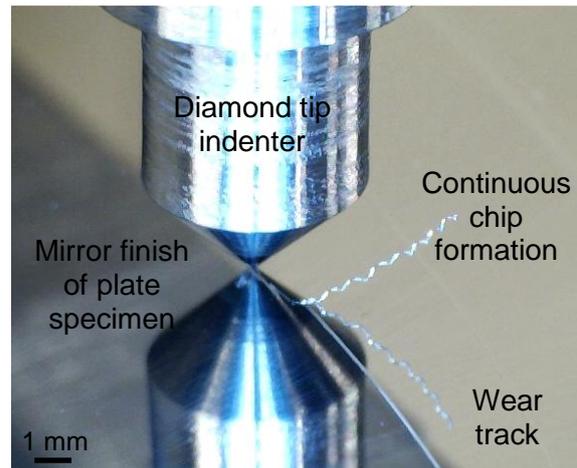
Material removal through micro-cutting during abrasive scratch tests
